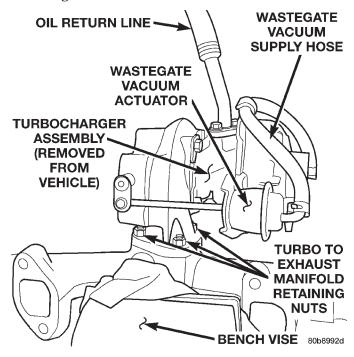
Turbocharger / Exhaust Manifold Assembly Cleaning
